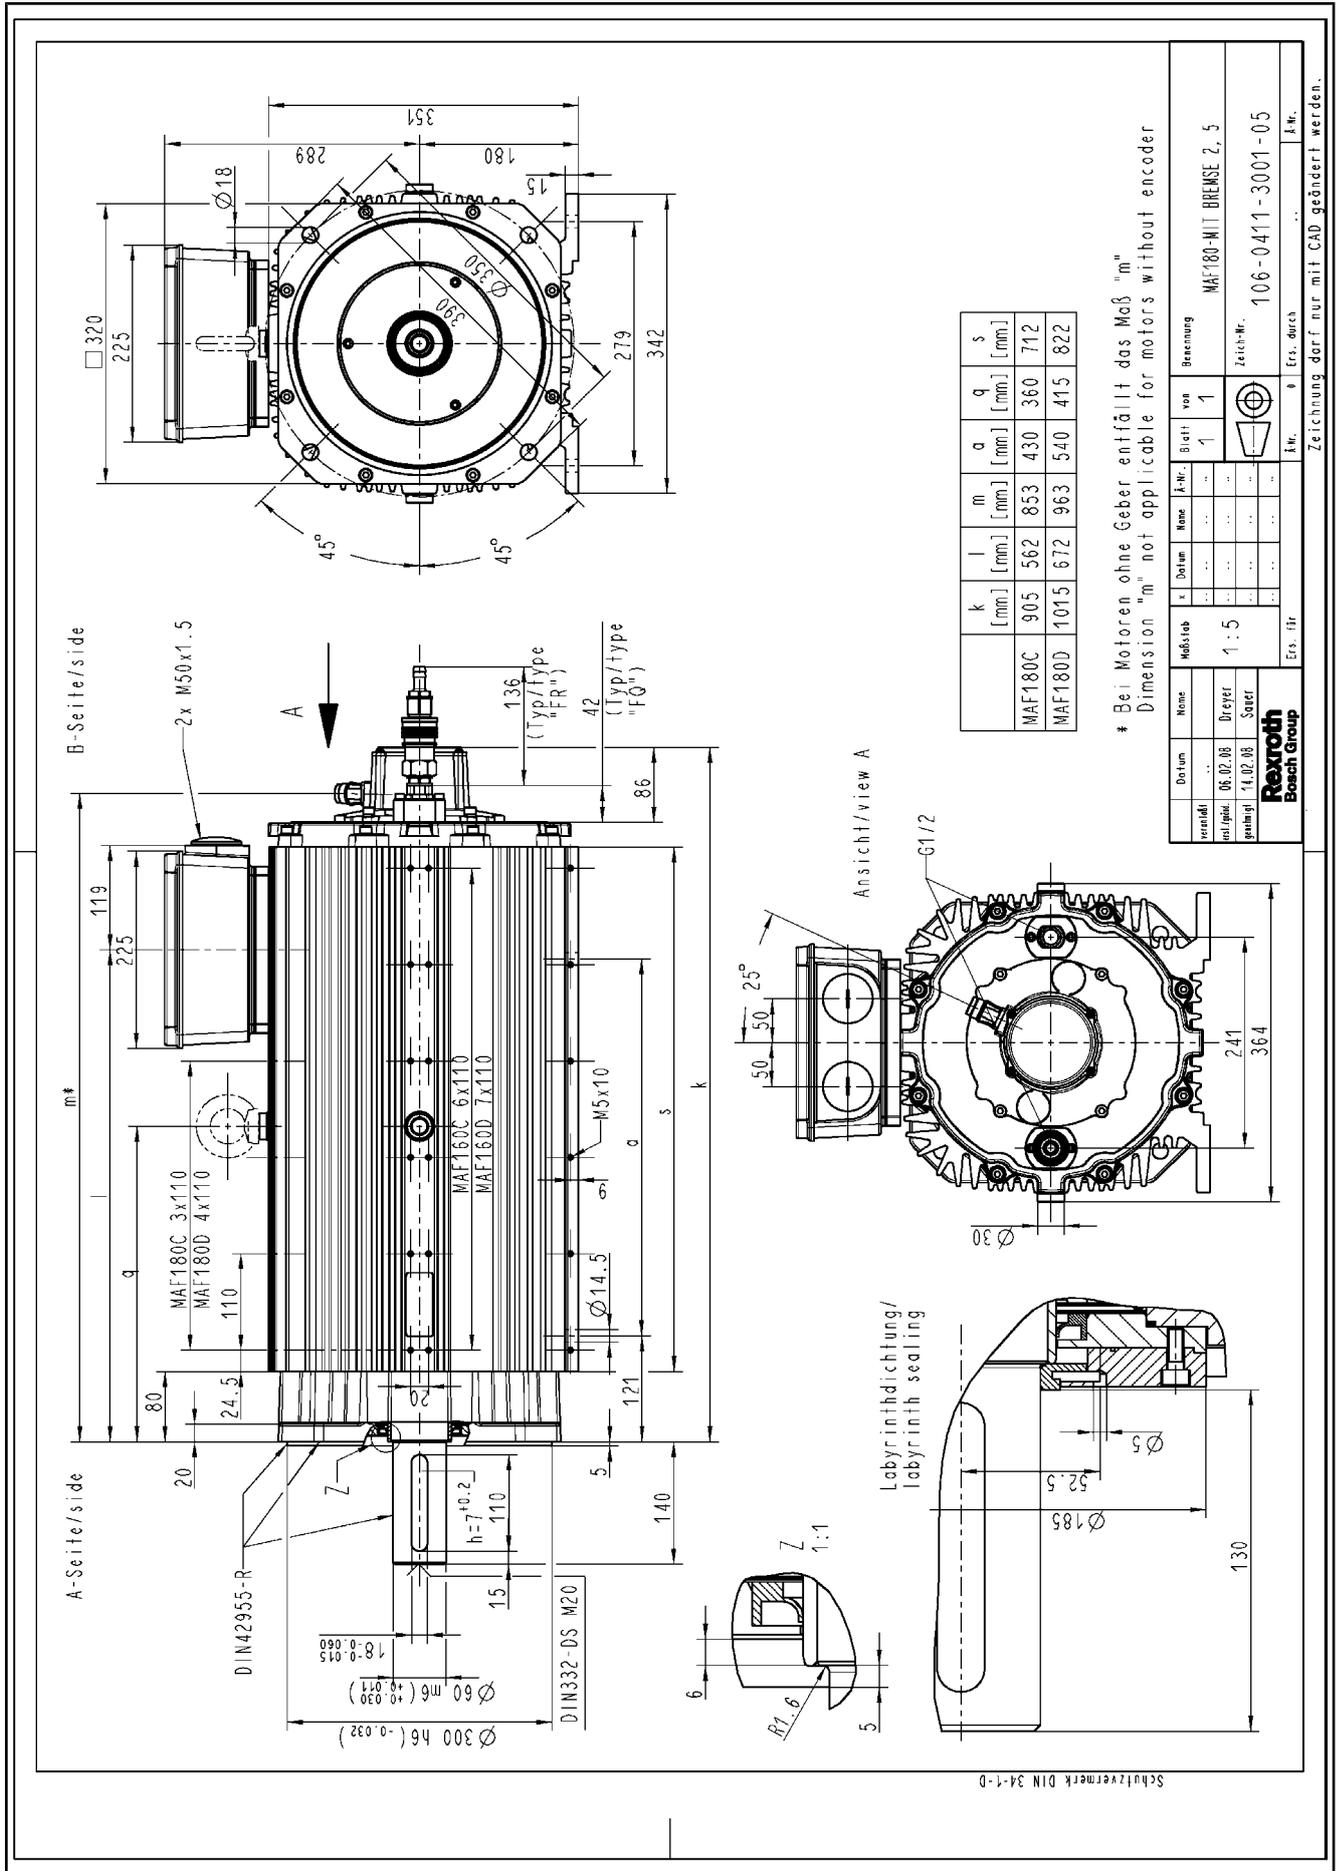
Dimension sheet MAF180 with brake 2 or 5
